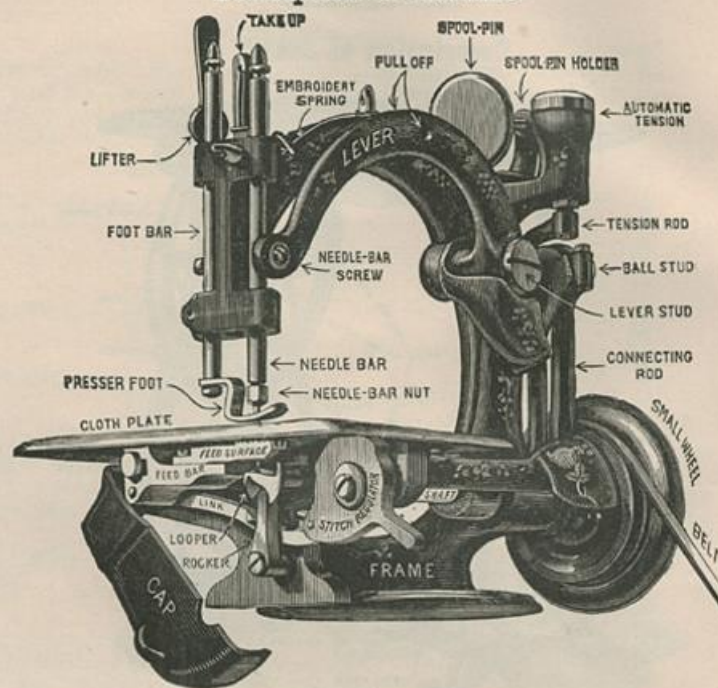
NAMES OF THE PARTS OF THE MACHINE.
